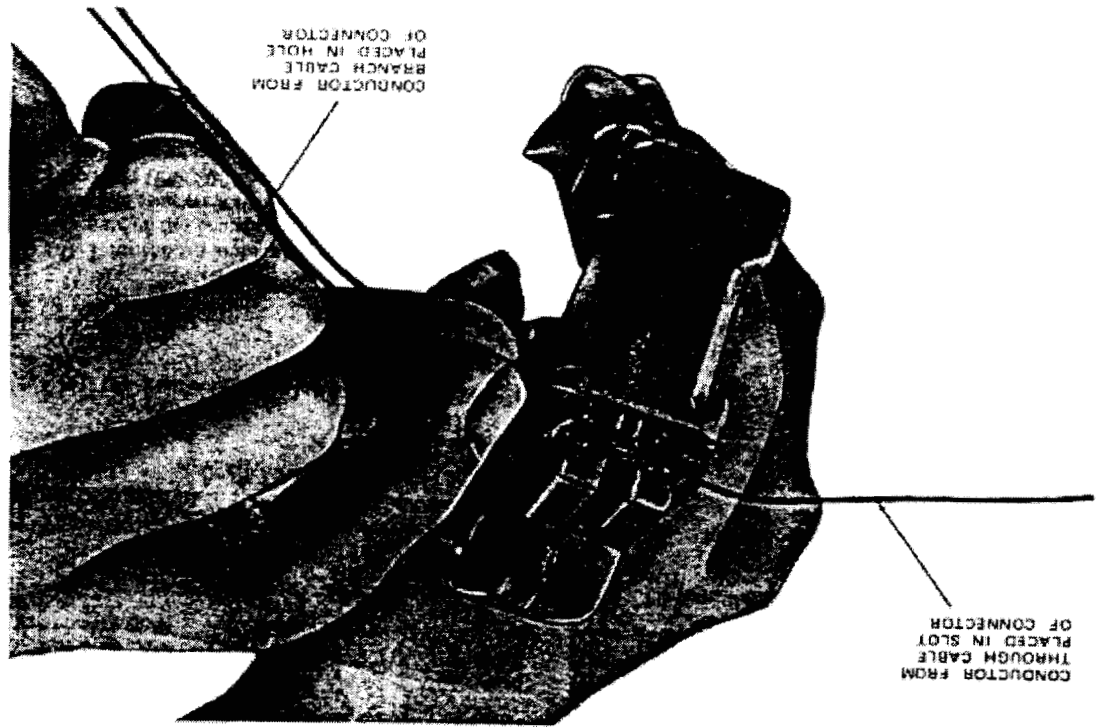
Half-Tapped Conductors Using H Connector Presser
